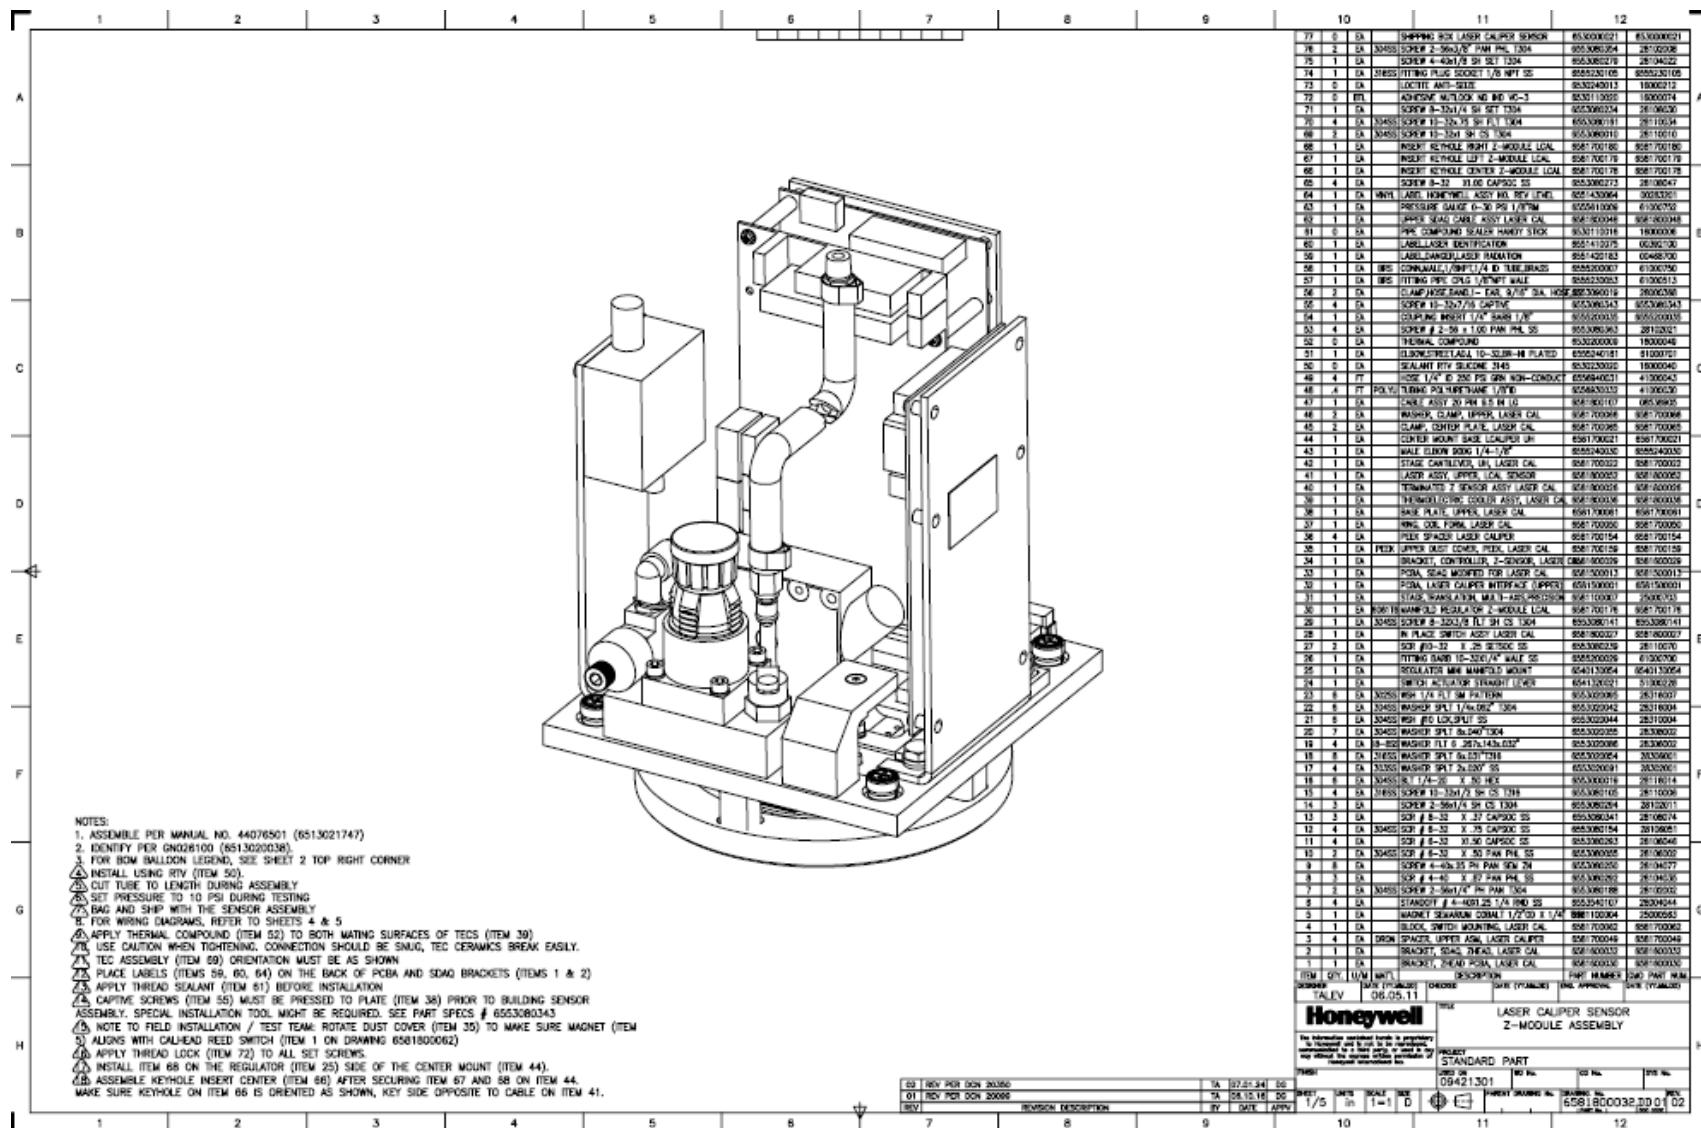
6581800032: laser caliper sensor z-module assembly (1/5)
